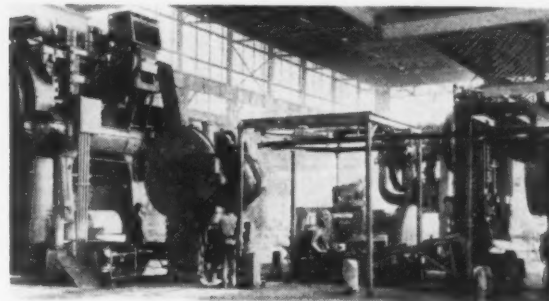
A 6000-ton Ajax press, largest in the auto industry, is used for press forging. A 2-die setup is employed.
